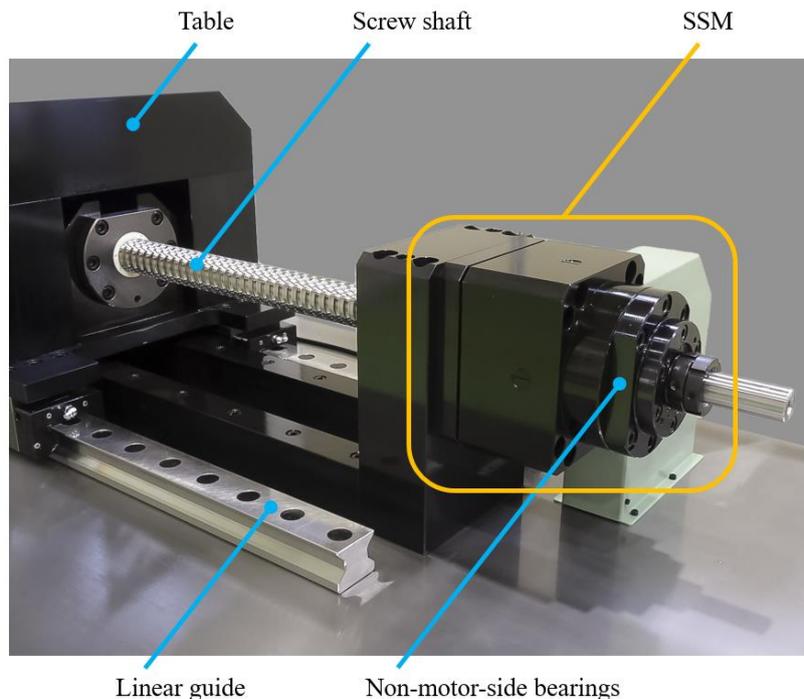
Setup of experimental ball screw feed drive with proposed mechanism (SSM).
